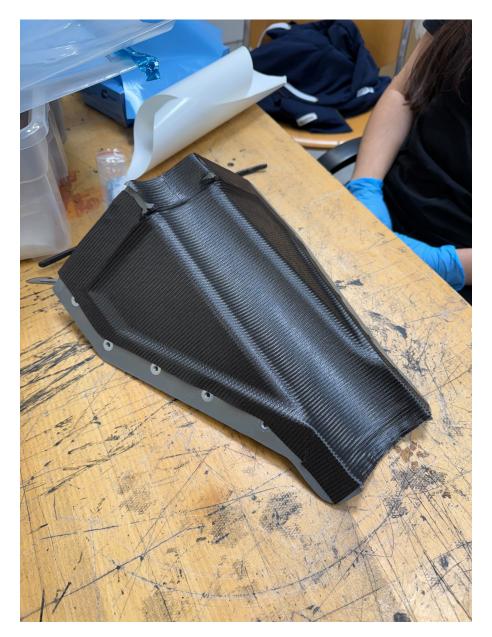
Laminating a fincan segment into our in-house manufactured mould
